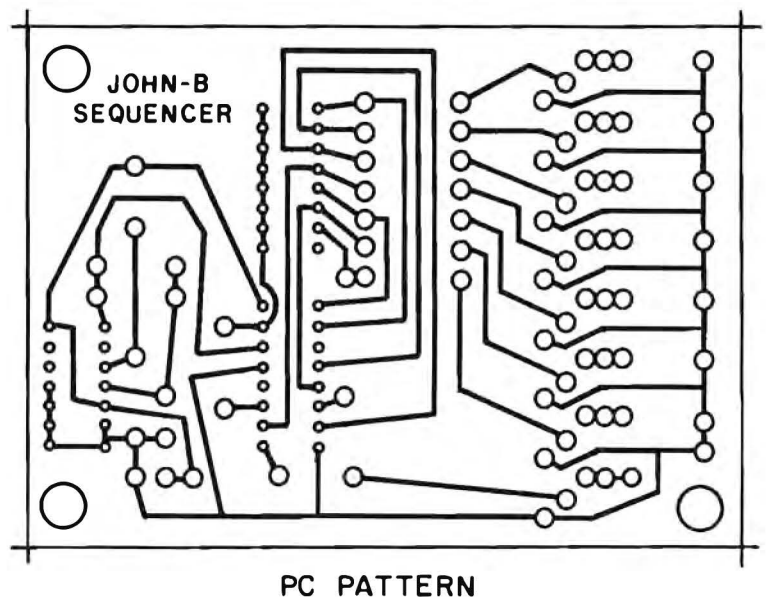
Sequencer PC Board Pattern And Parts Placement
